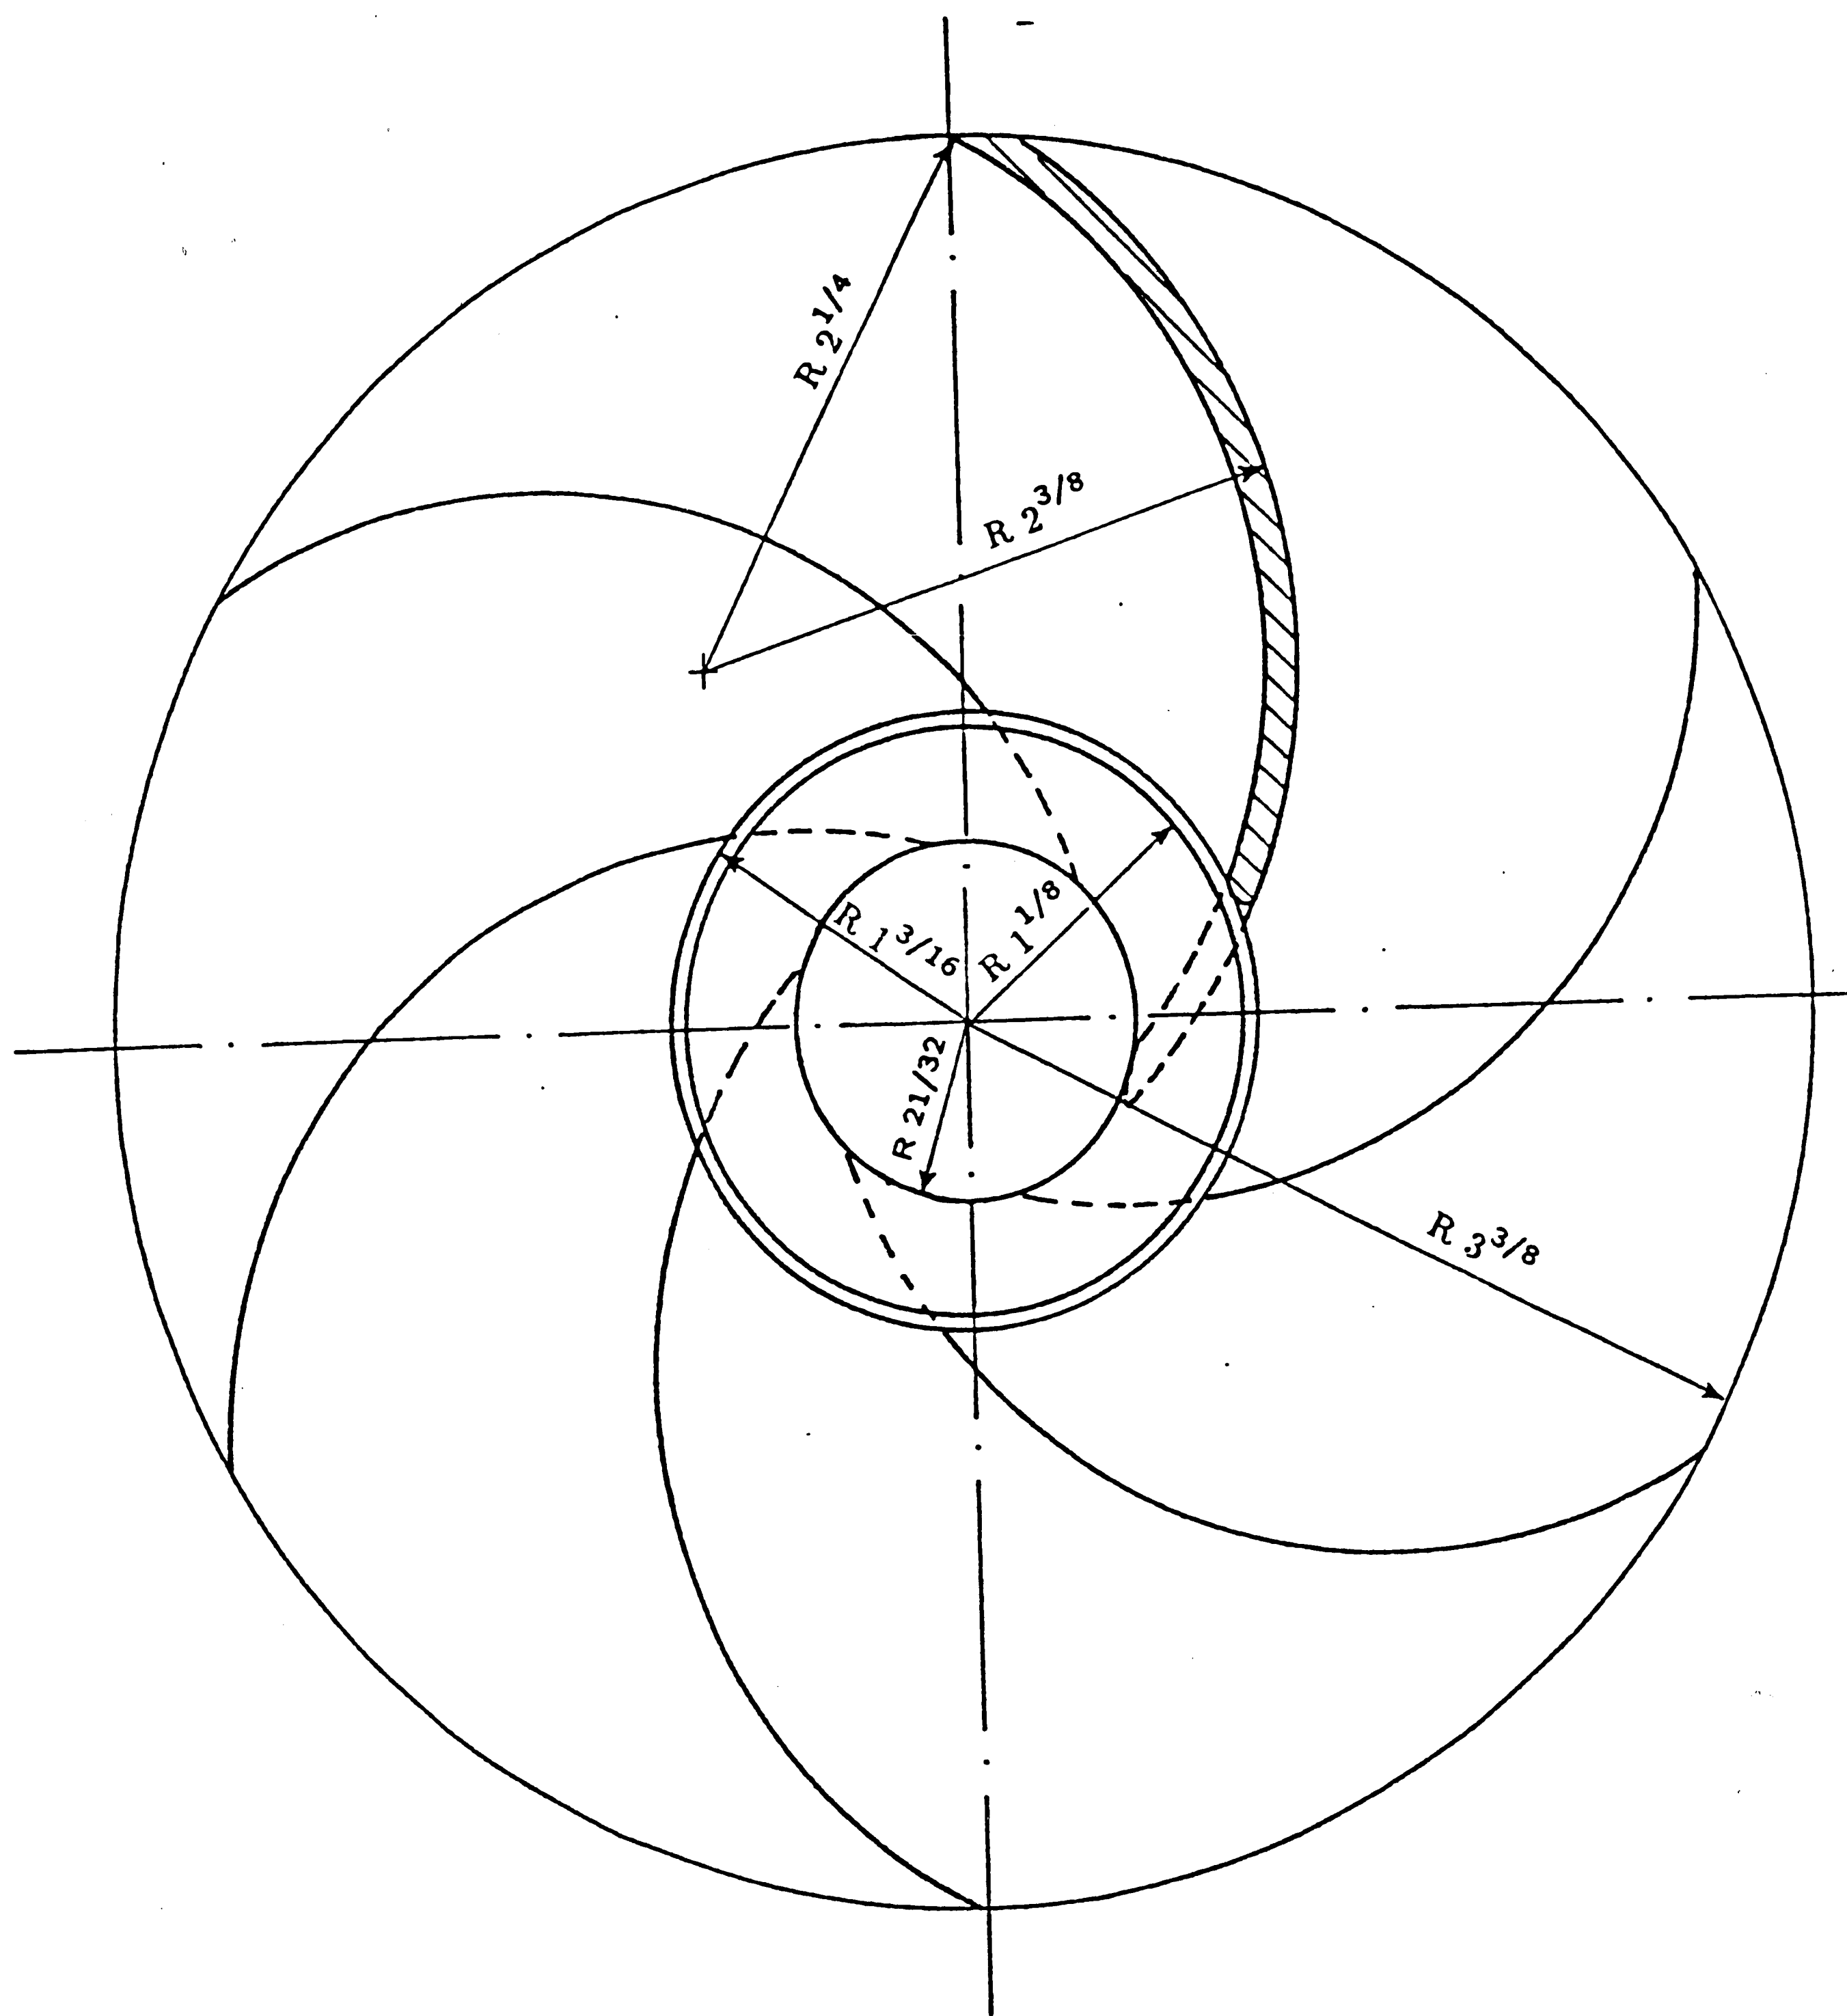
Detailed dimensions of the six blade impeller, plan view.
